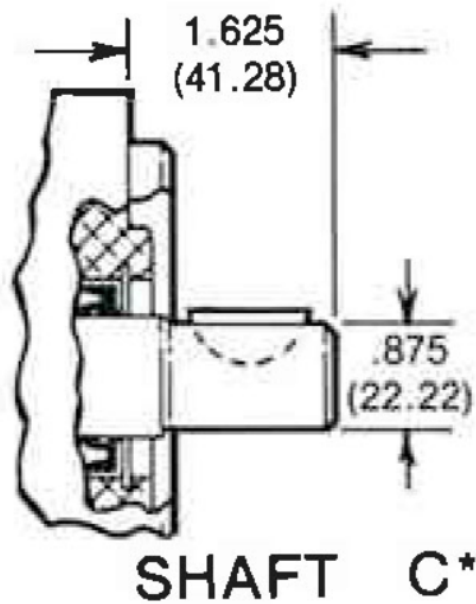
Drawing of Shaft and Key of 50 Series Hydraulic Motor (Part No. 50MH38DBCSC) Used in Rotation System Provided by Cross Manufacturing
